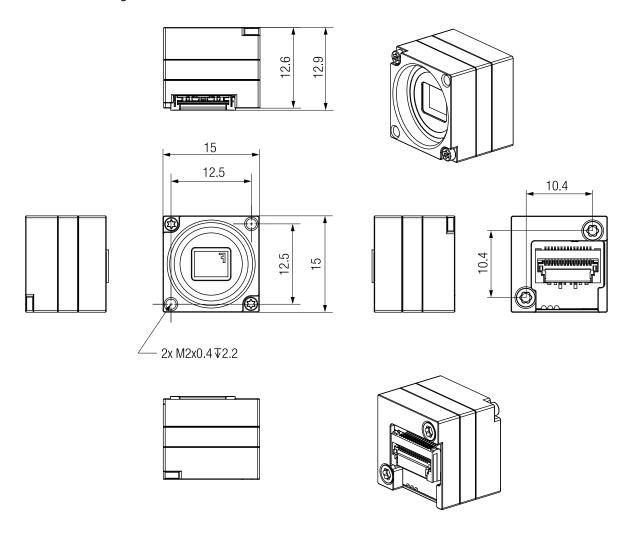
Dimensional drawing of MU050xR-SY with ADPT-MU-CX3-FL adapter
